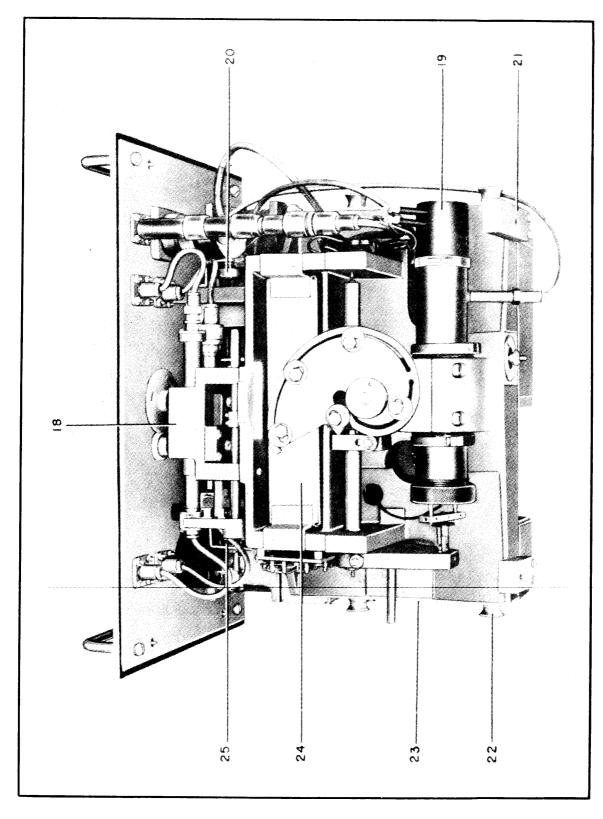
Tuning Head and Panel Assembly (Sheet 2 of 2 Sheets), Index Nos.18 through 25
